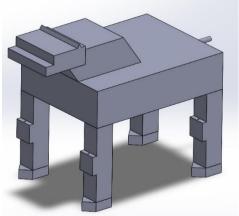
Preliminary CAD Model of Soft Quadruped Robot
